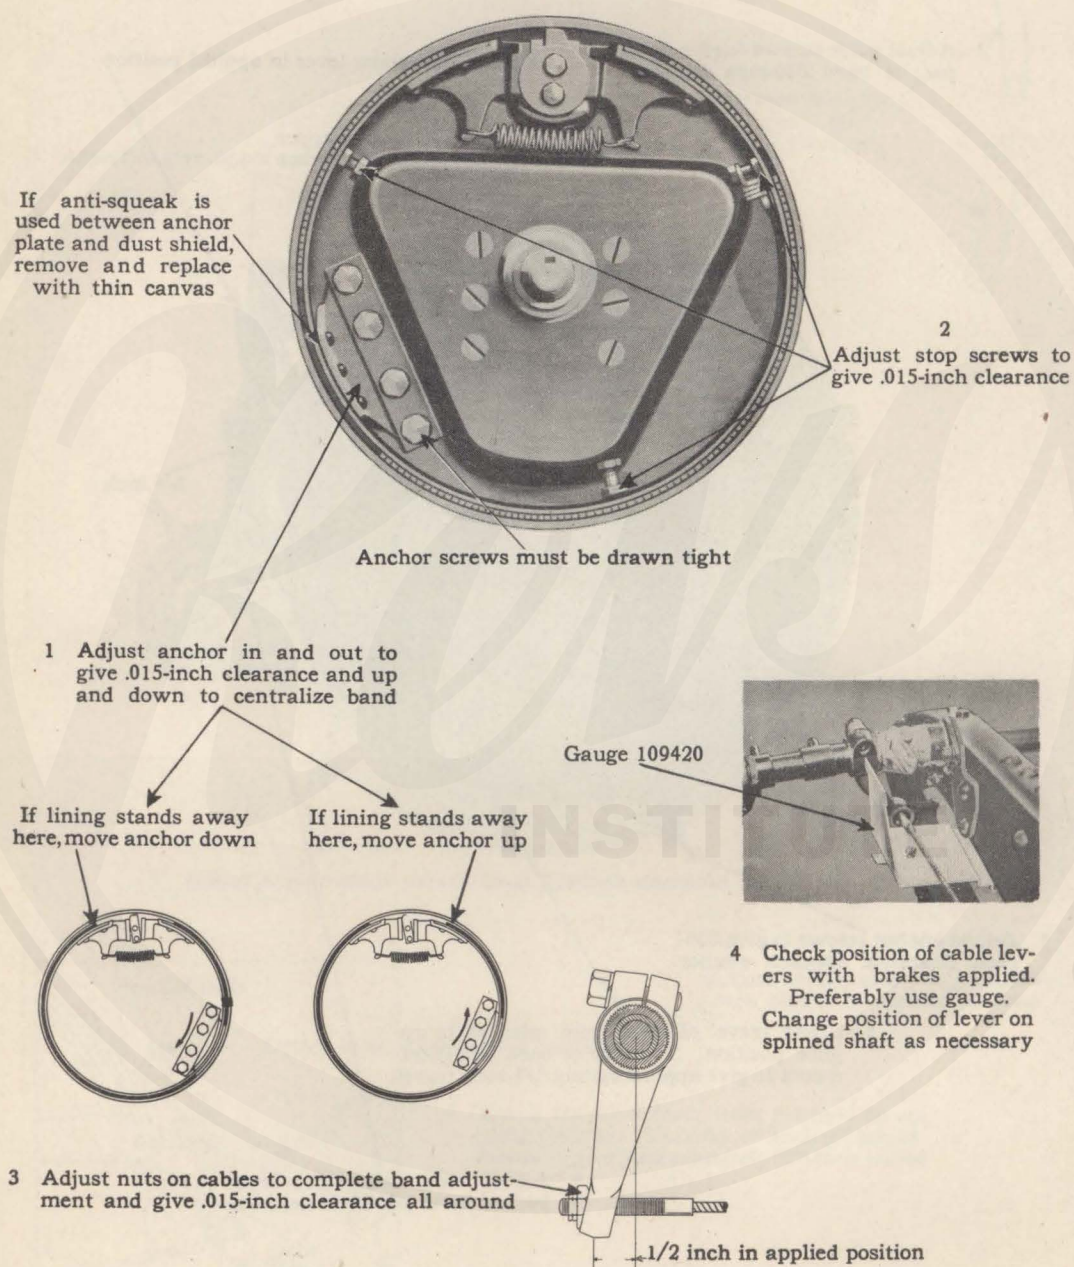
Adjustment of La Salle 303 front brakes—first type.
